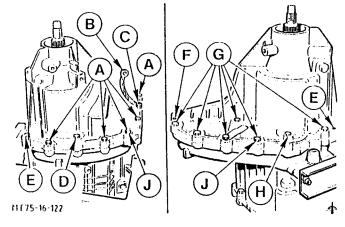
Bolts securing transfer box housing to rear transmission housing.
